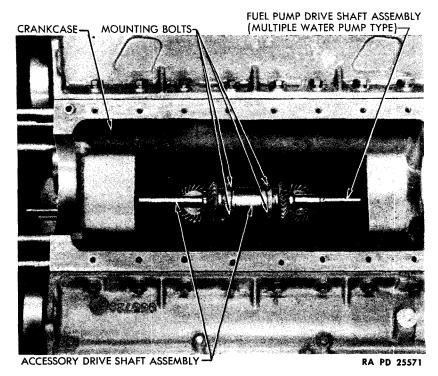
Accessory Drive Shaft In Position In Crankcase
